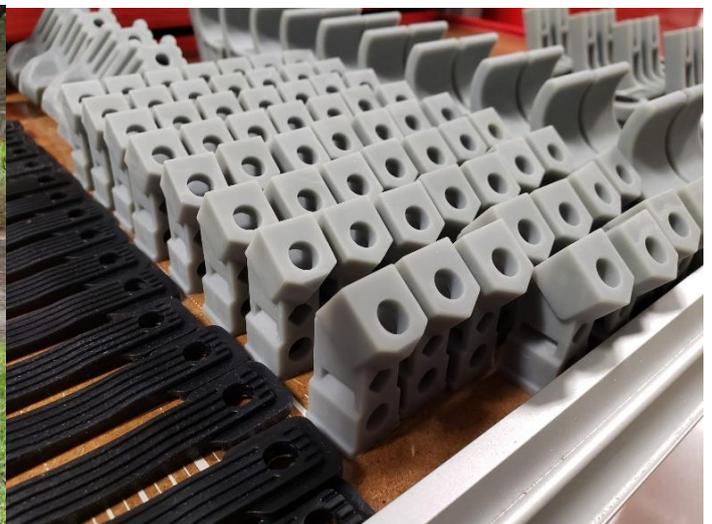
D-printed go-kart parts printed with engineering 3d resins: Strong-X and Tough-X resin for the Torque Off Road TQ390.
